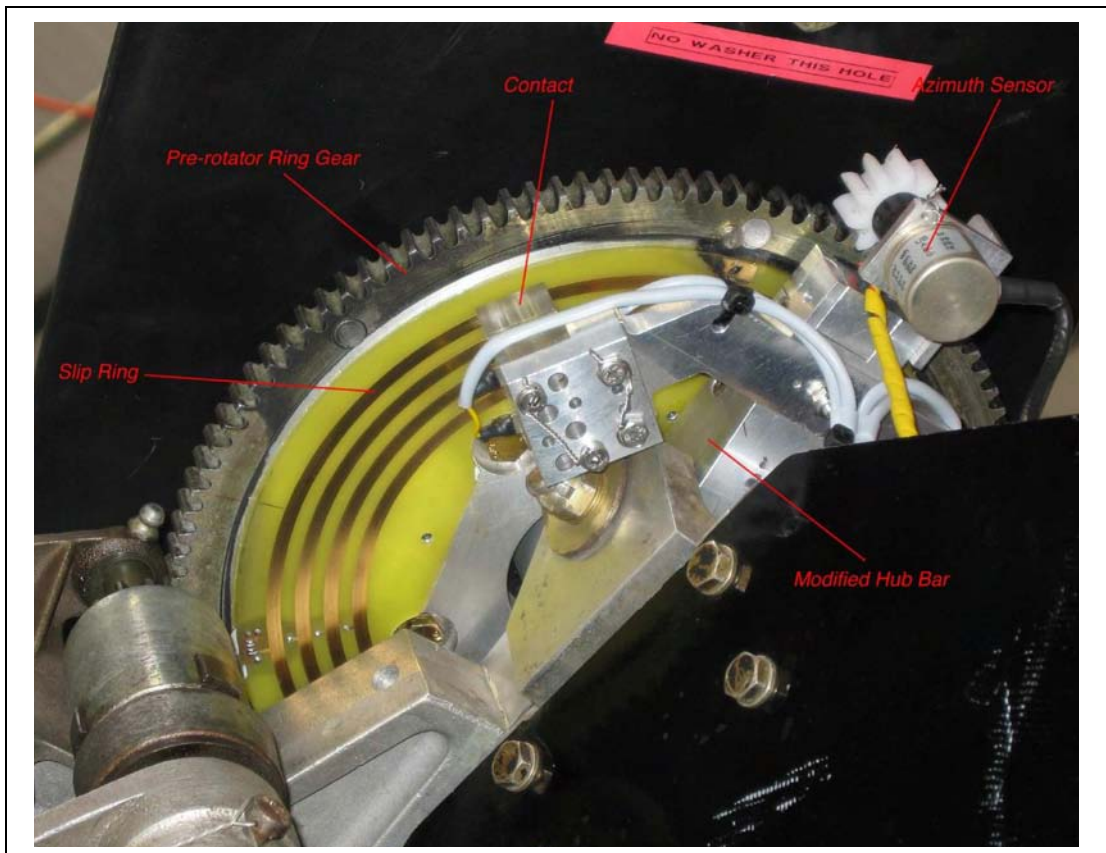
d) Additional Modification of G-UNIV for Teeter Angle Measurement (Slip Ring and Teeter Bar Assembly)
